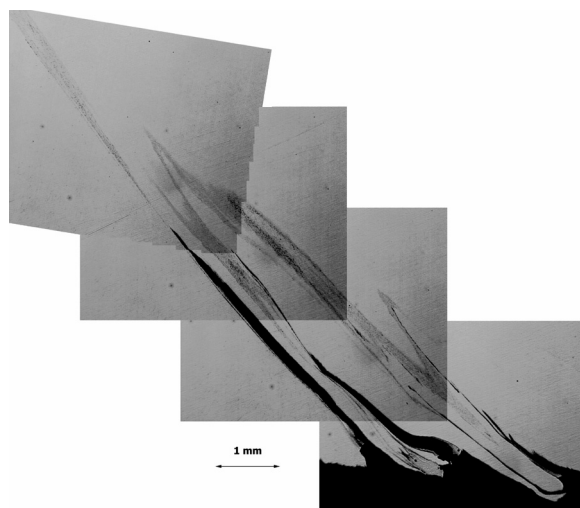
Higher magnification example of the weld defect in FSW #2.
